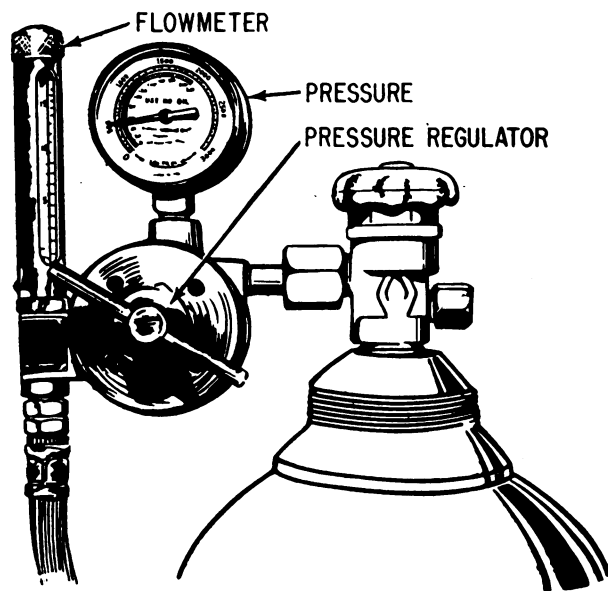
Regulator, flowmeter, and pressure gage. AM.563
